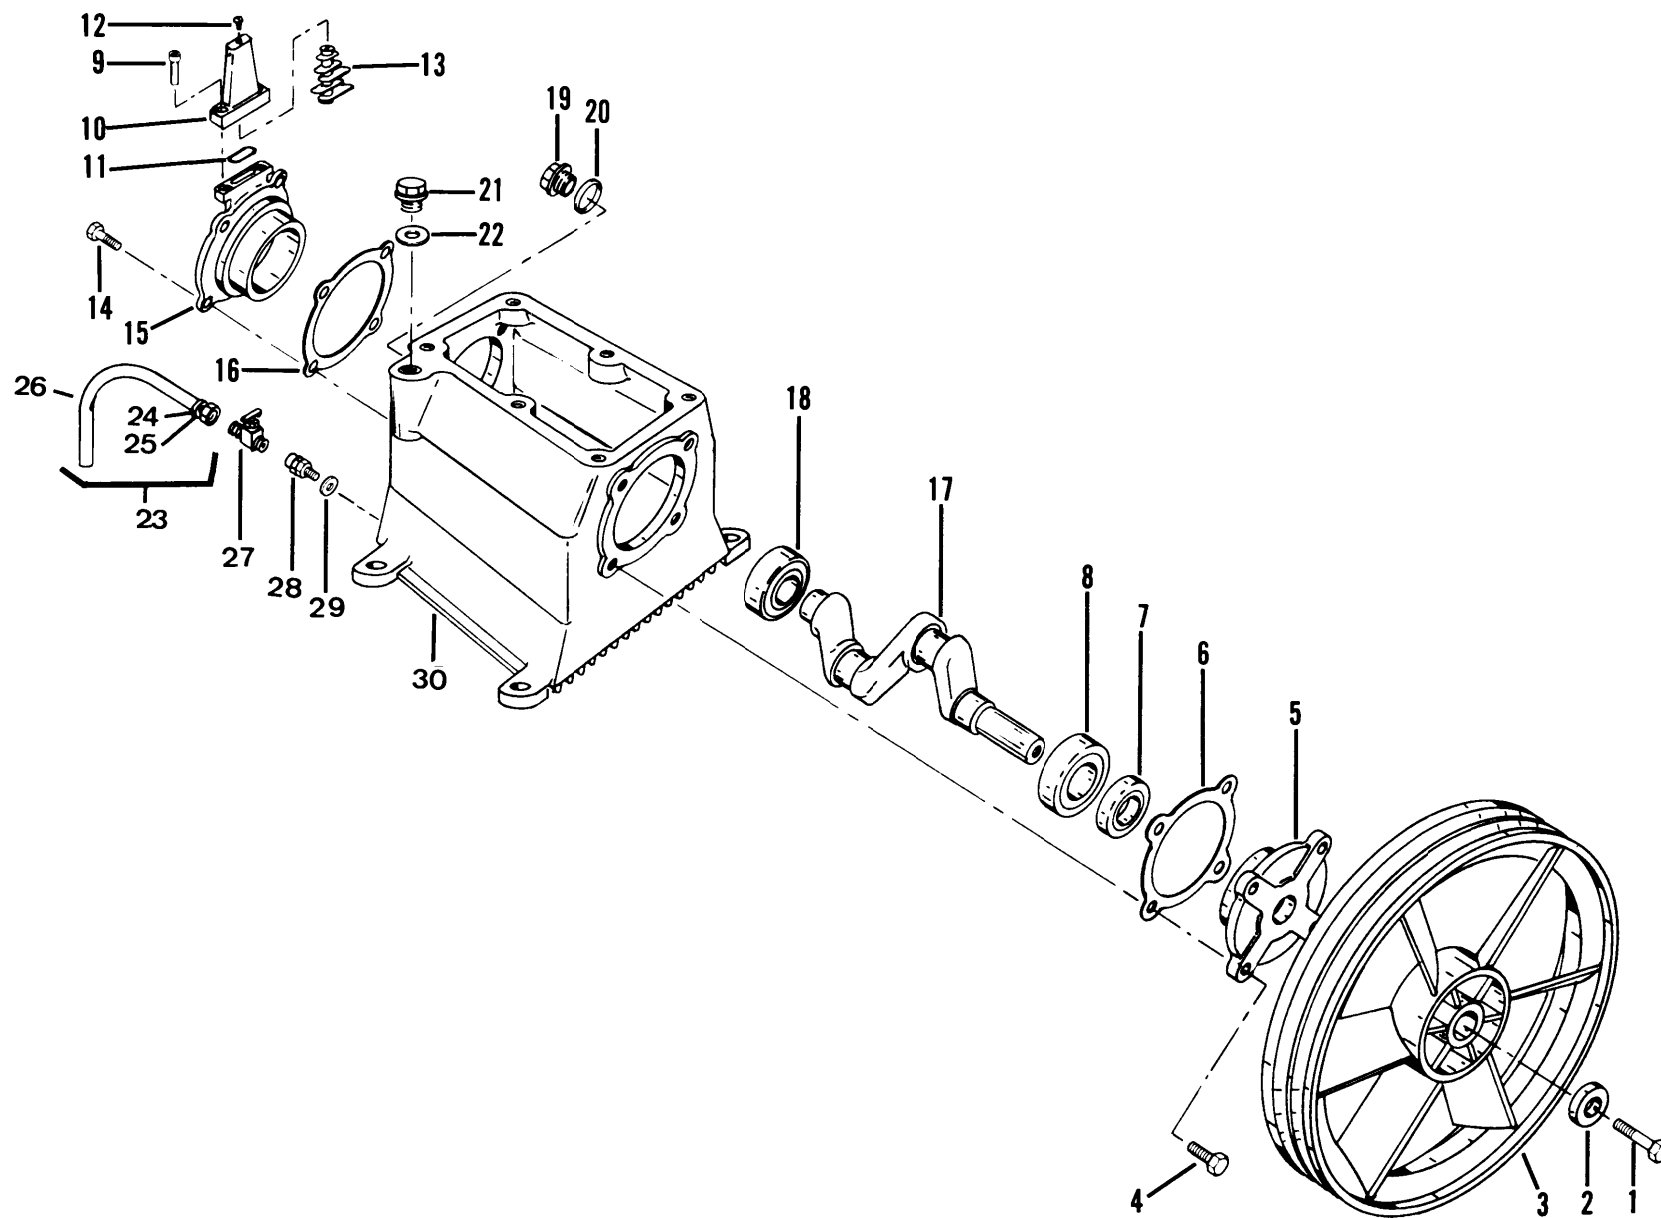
Flywheel, crankshaft, bearings, seal, and frame
